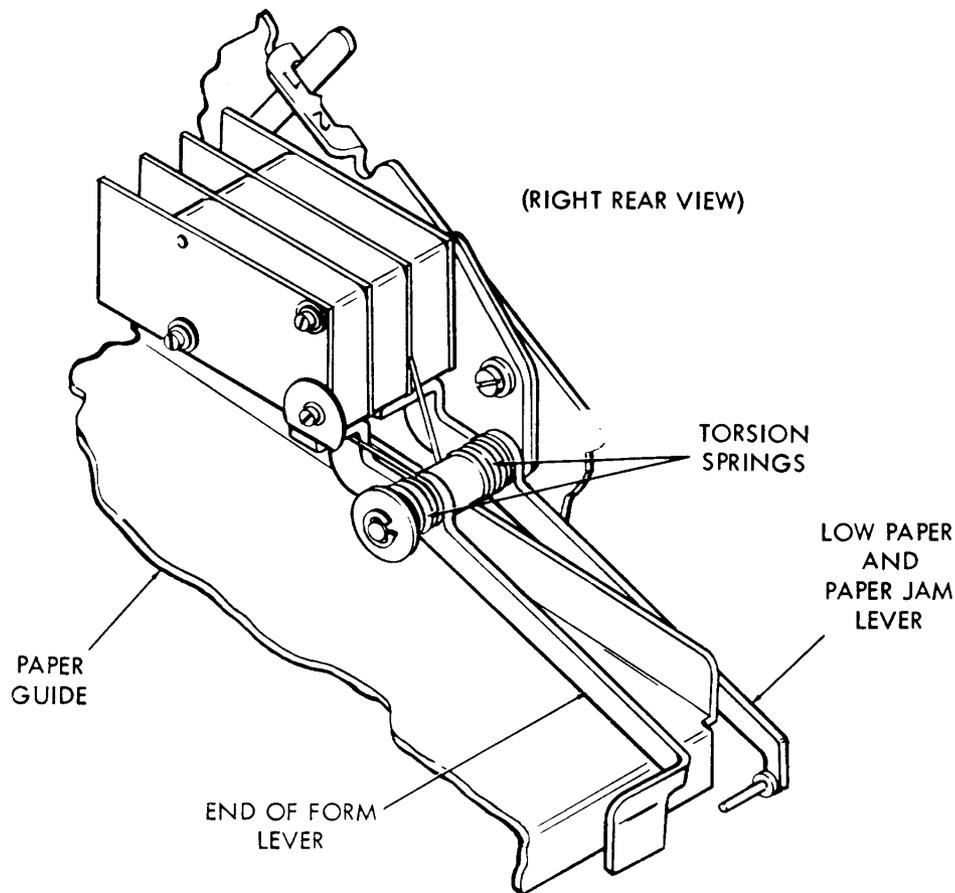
Form Out and Paper Jam Contacts (Sprocket Feed)
